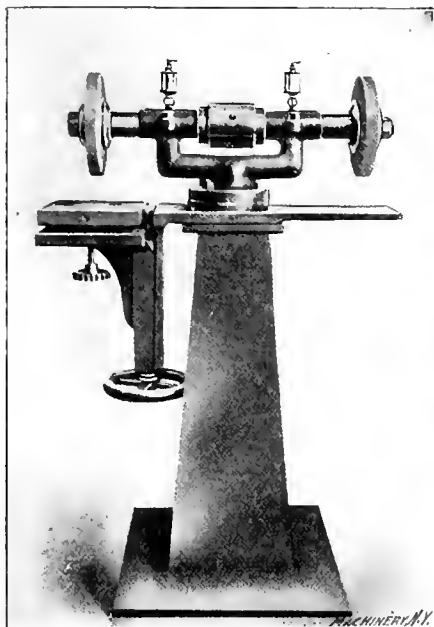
Combined Surface and Tool Grinder built in the School Shops.
